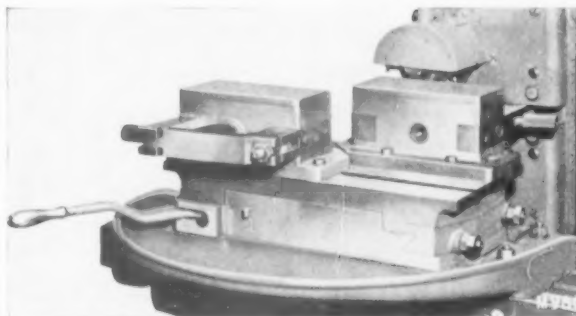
Sundstrand Index Base with two fixtures and coolant trough. Operator changes work pieces in one fixture while milling is in progress at the other.
